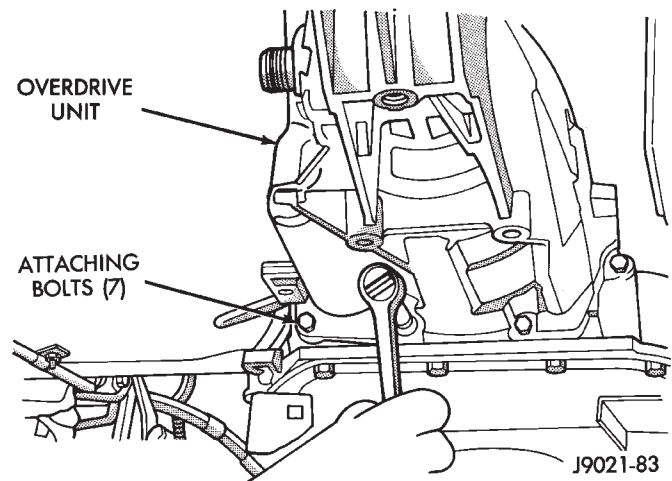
Removing/Installing Overdrive Unit Attaching Bolts
